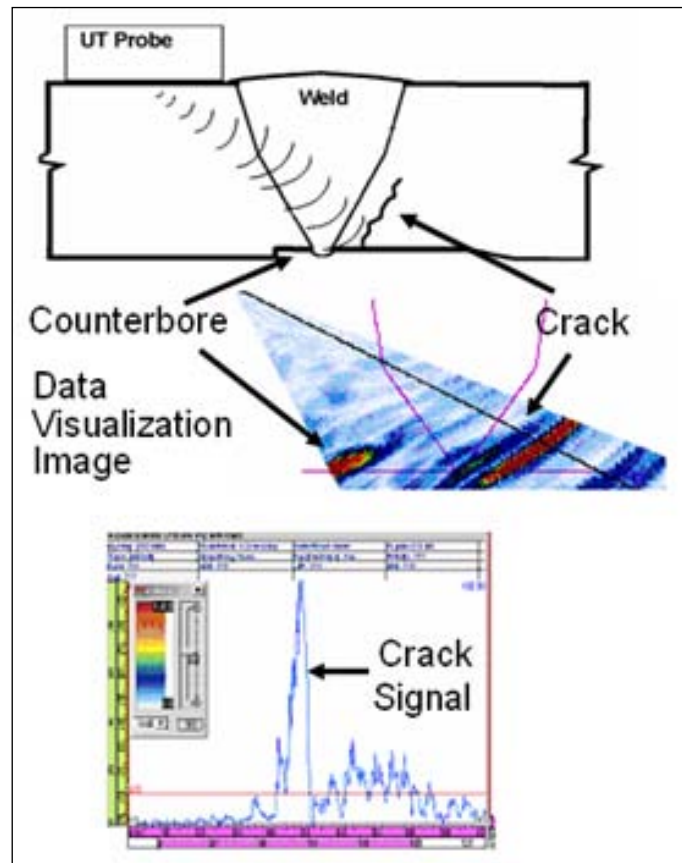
Schematic view of flaw detection at the far side of a weld, using a phased array ultrasonic (PA-UT) technique. PA-UT improves flaw detection in coarse-grained metals and welds
